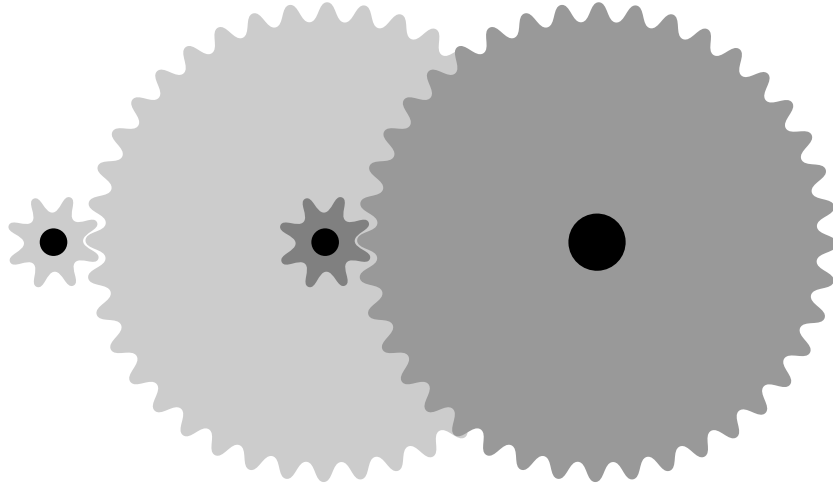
Two-stage gearing. The first small gear drives a large gear, which is on the same shaft as a second small gear. The second gear drives another large gear, producing an overall gear ratio of 25:1.
